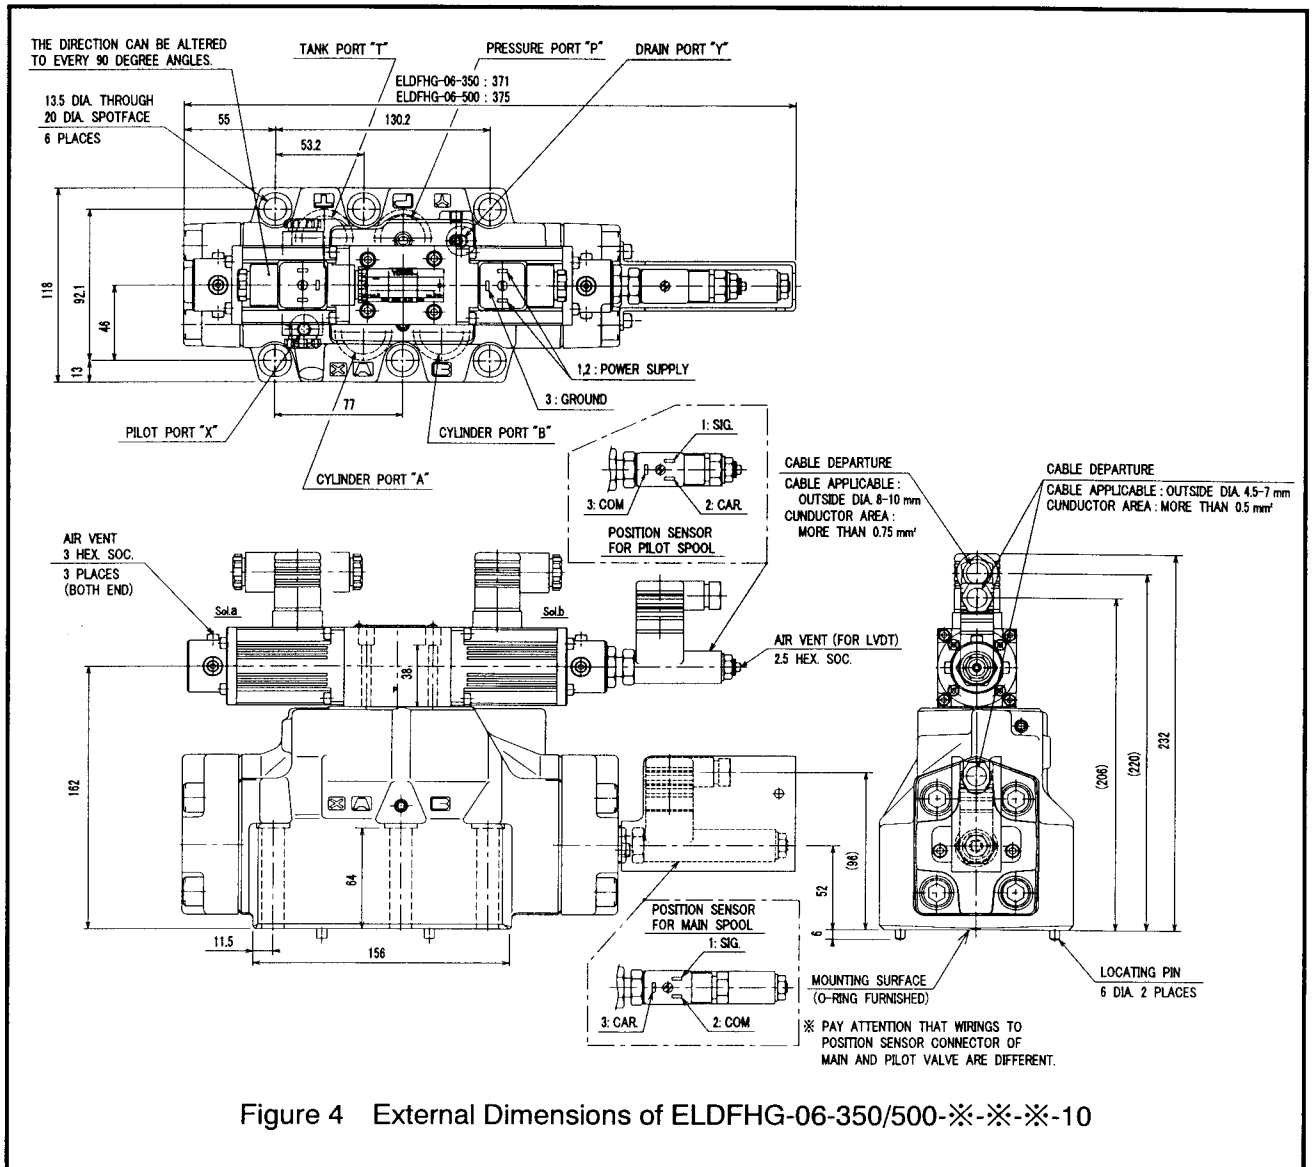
External Dimensions of ELDFHG-06-350/500-※-※-※-10
